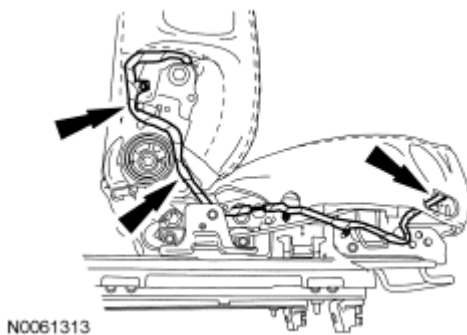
Locating Side Air Bag Wire Harness From Seat Track & Cushion
